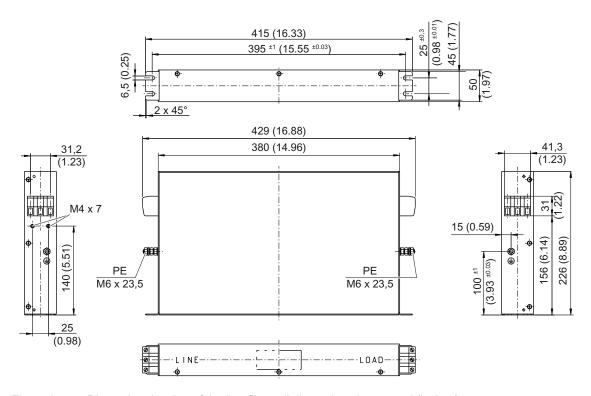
Dimension drawing of the line filter, all dimensions in mm and (inches)
